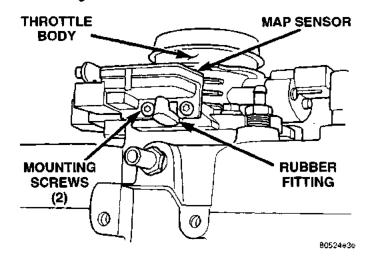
Rubber L-Shaped Fitting—MAP Sensor-to-Throttle Body
